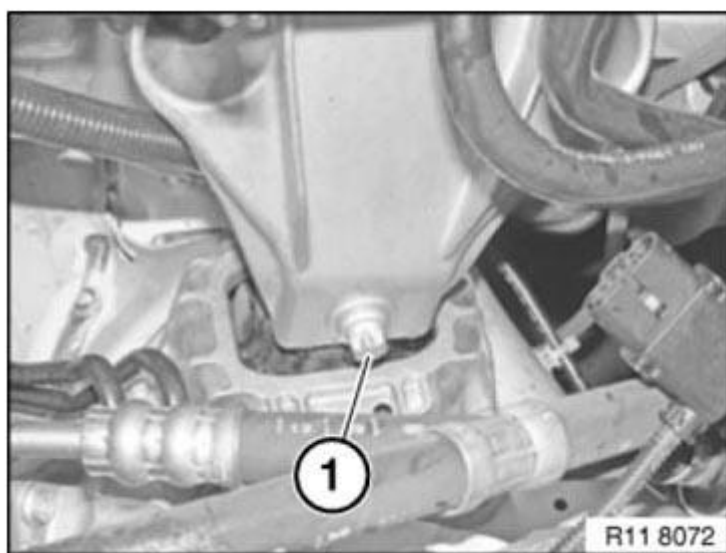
Identifying Screws On Engine Mount On Left And Right
